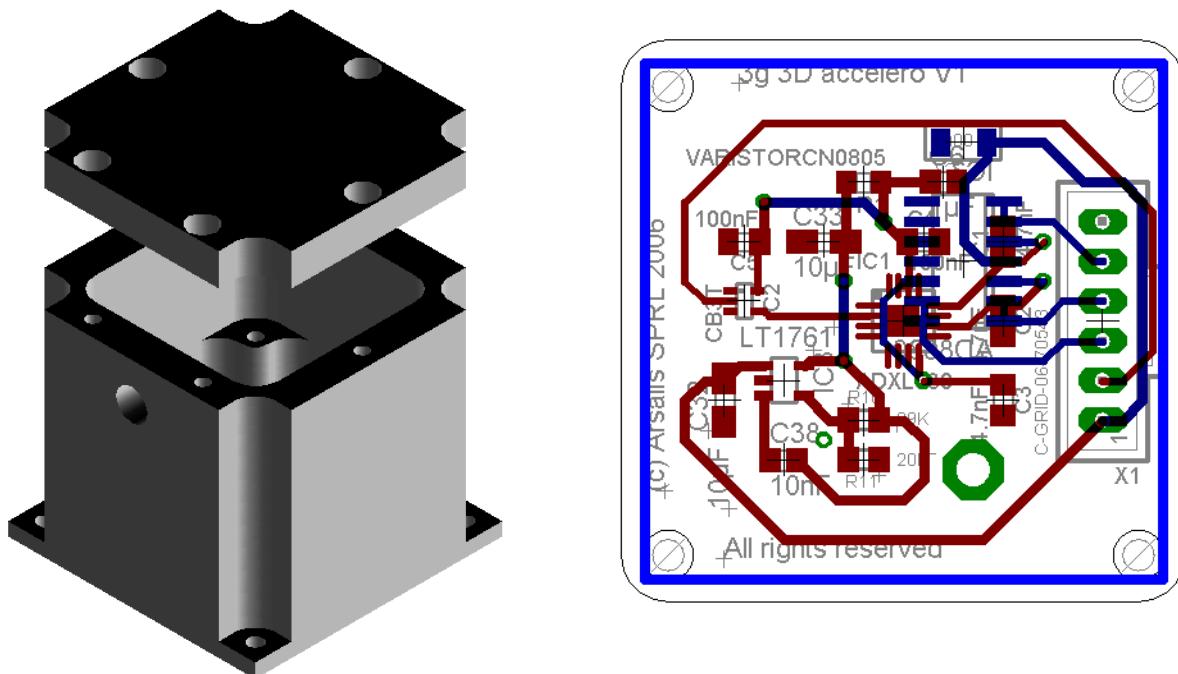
Three-dimensional environmental accelerometer case (isometric view, left panel) and PCB layout (right panel).
